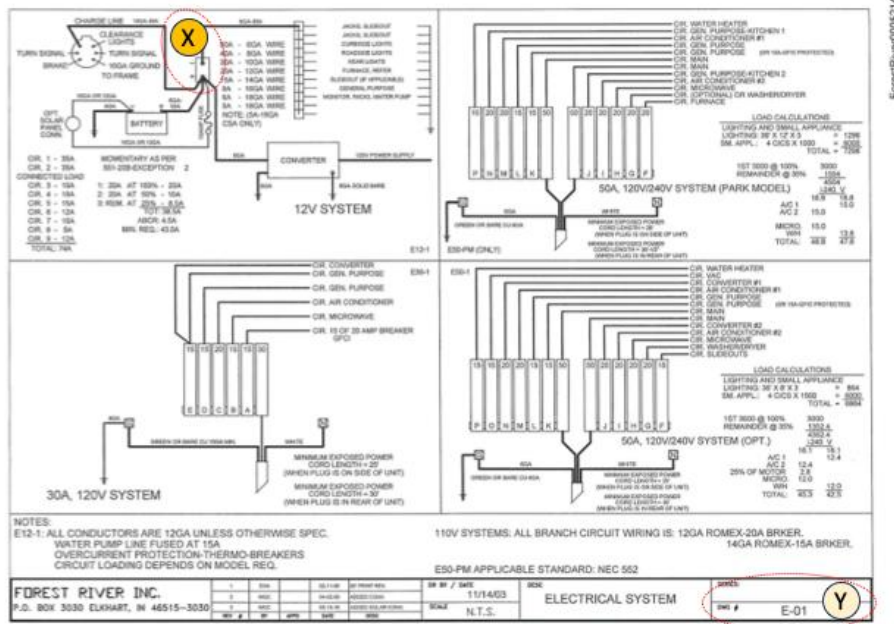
Forest River Electrical System drawing E-01 (ForestRiver0005214)
